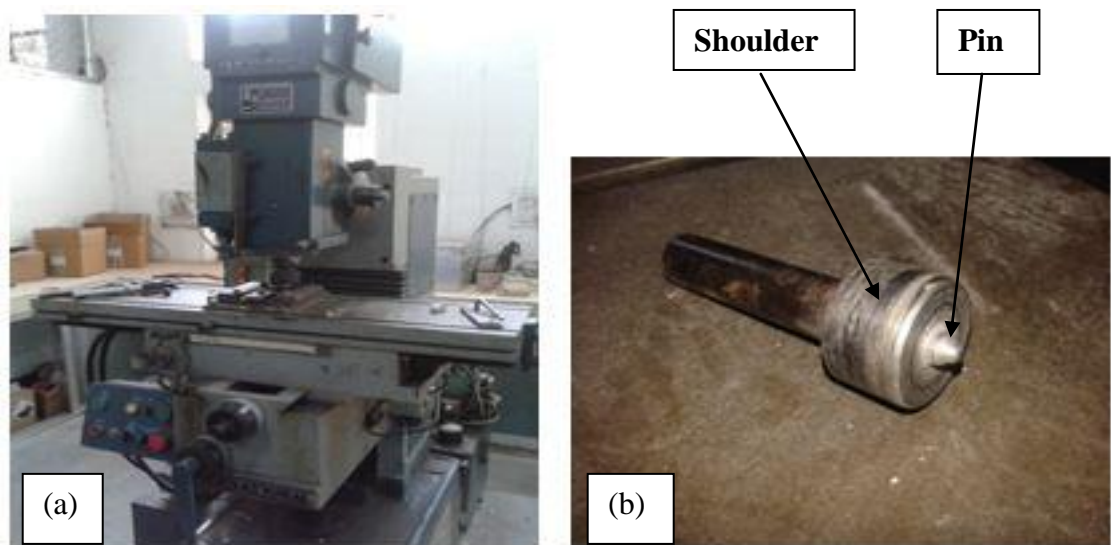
(a) Friction Stir Processing Machine and (b) FSP tool
